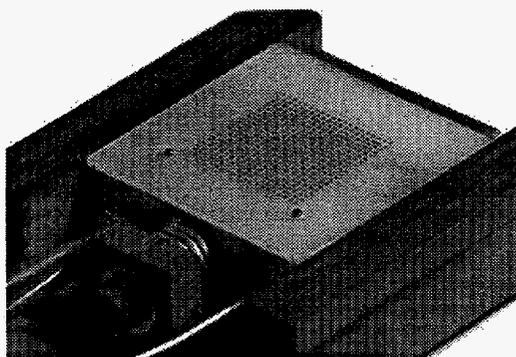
Circuit board heater attachment with circuit board. The cap screw and spring allow precise alignment of board to orifice plate.
